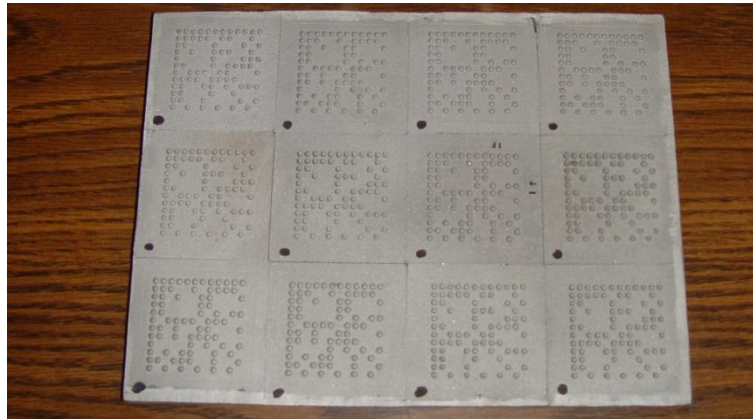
Resulting casting incorporating machined and pattern mark geometry and coatings.
